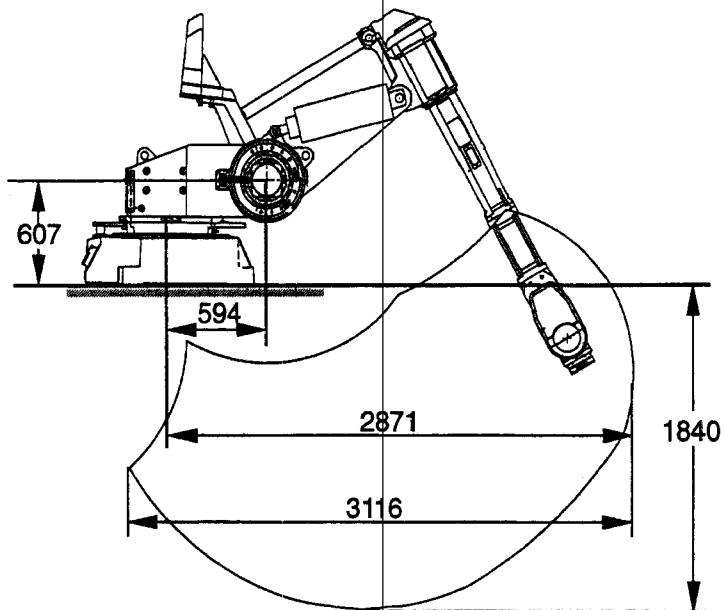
Working space of IRB 6400 and IRB 6400S (dimensions in mm).
